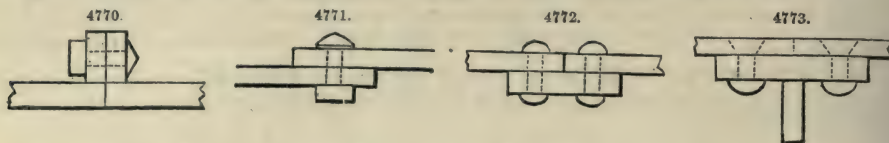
, with rivets, is a common mode of uniting plates of marine boilers, and other works required to be flush externally.
